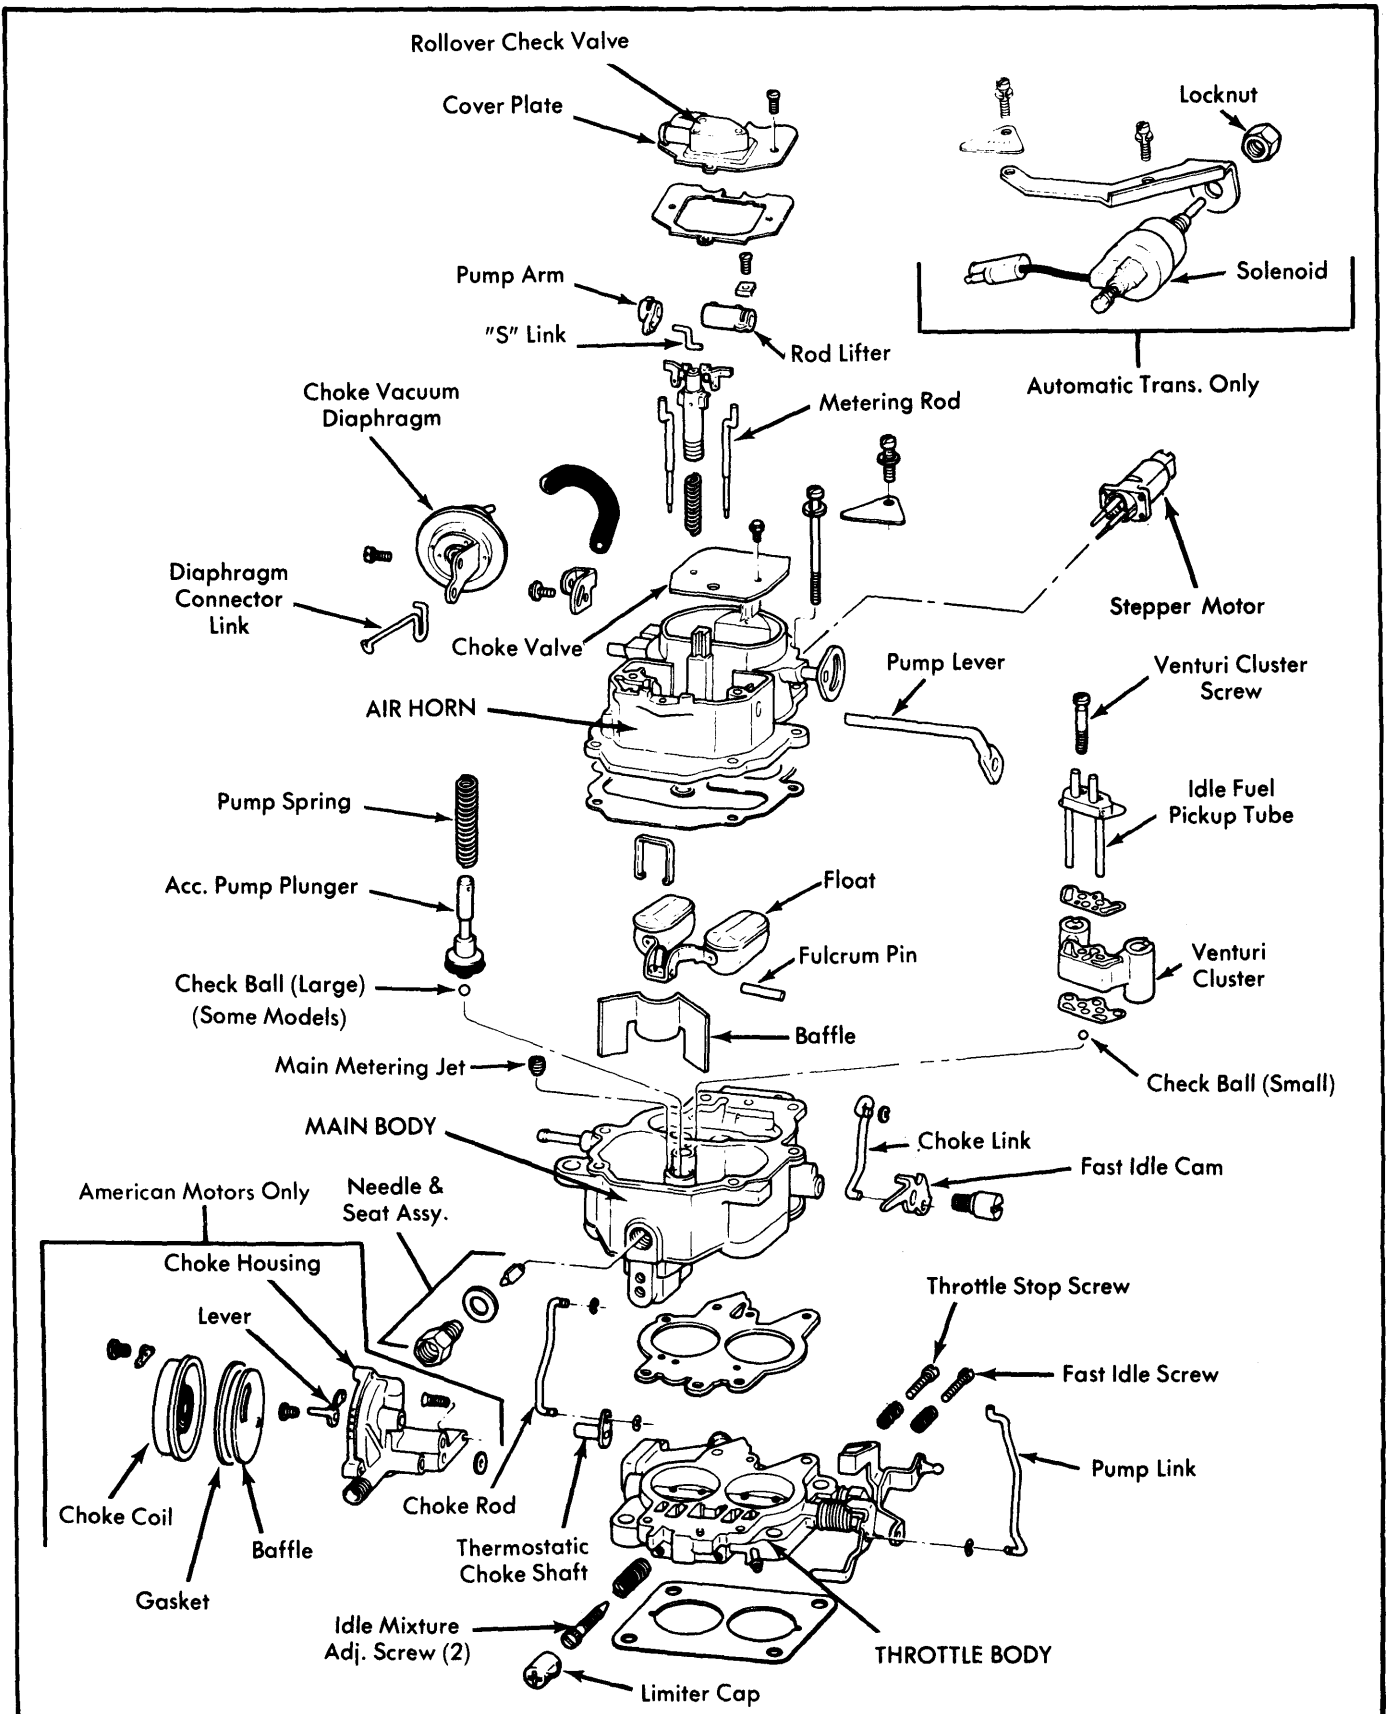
Exploded View of Carter Model BBD 2-Barrel Carburetor
